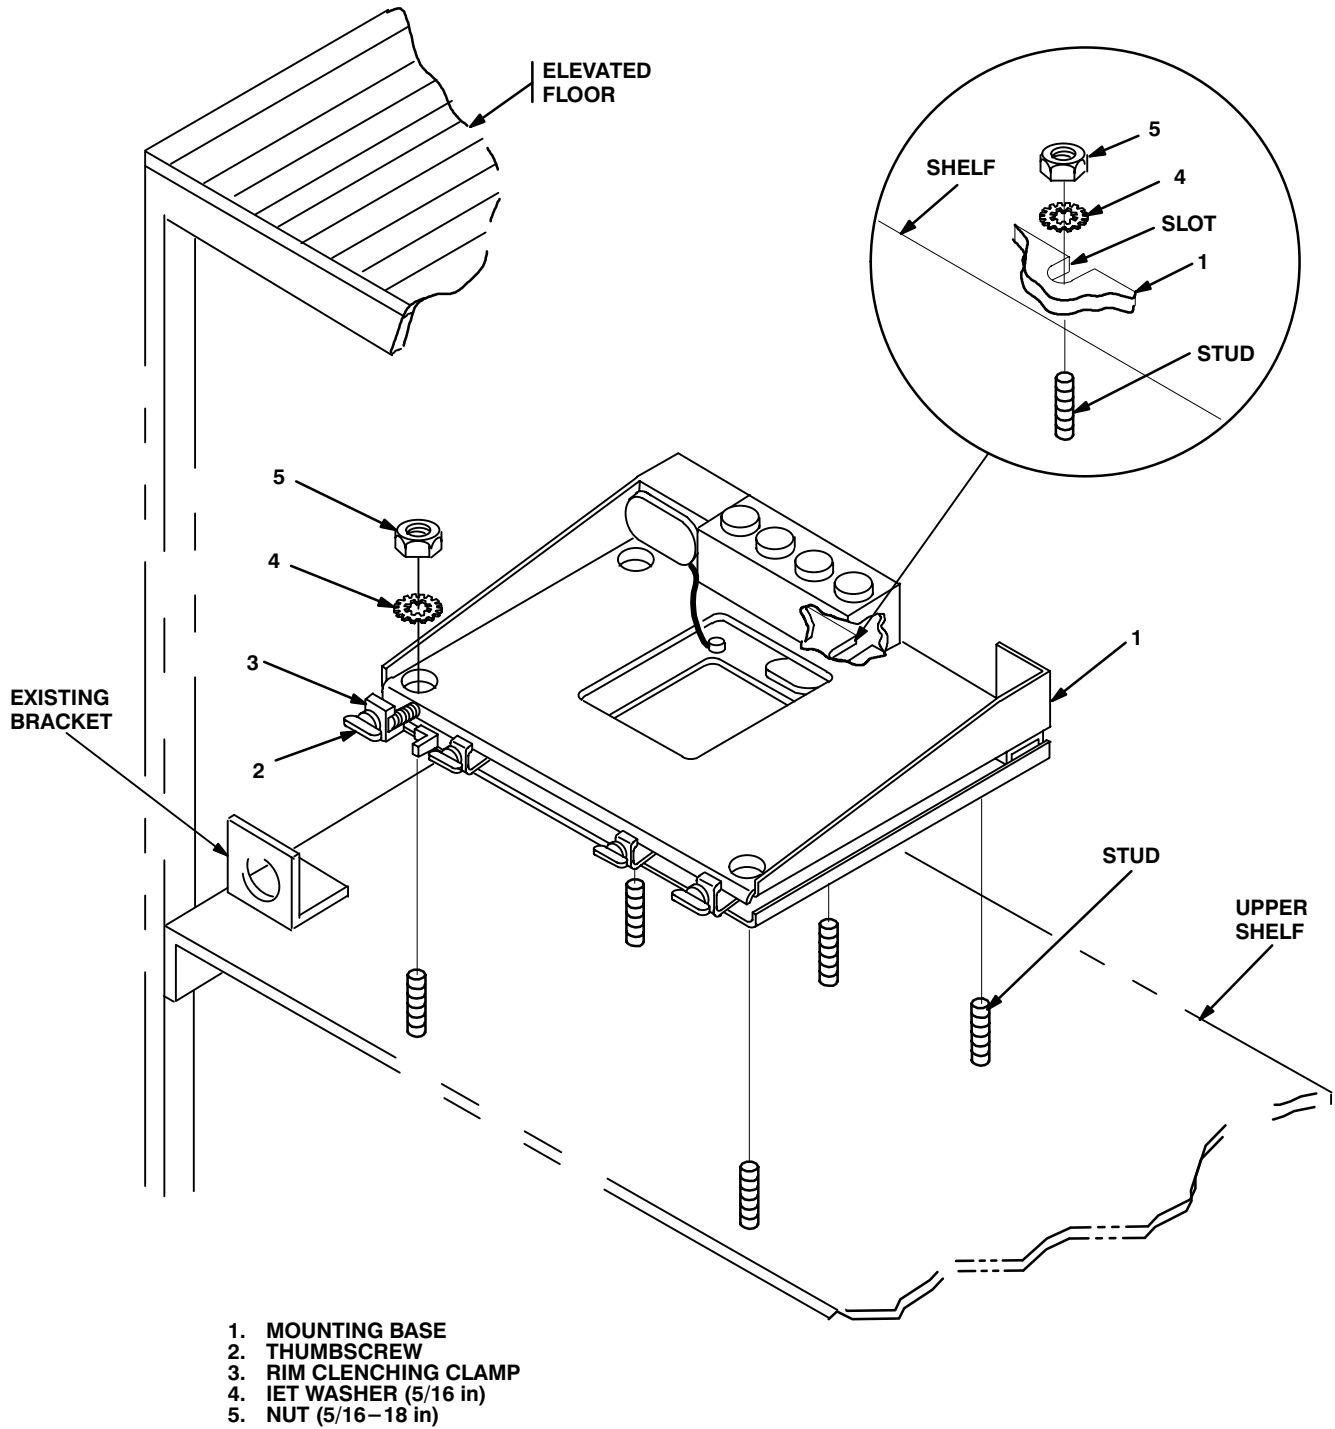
(2). Mounting Base Installation: Rear Equipment Rack (Below Elevated Floor)
